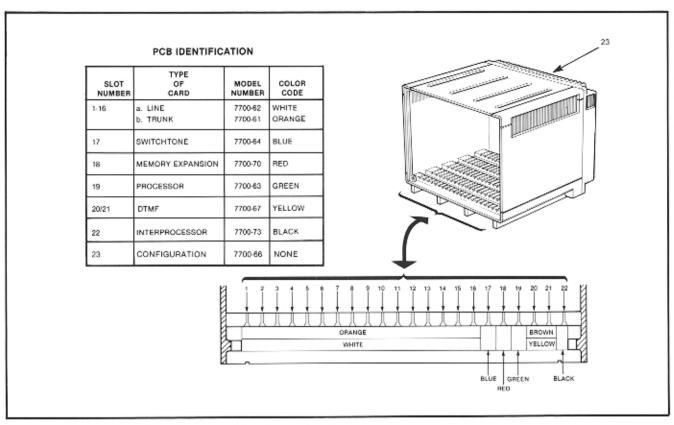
Prodigy PABX, Cabinet PCB Identification
